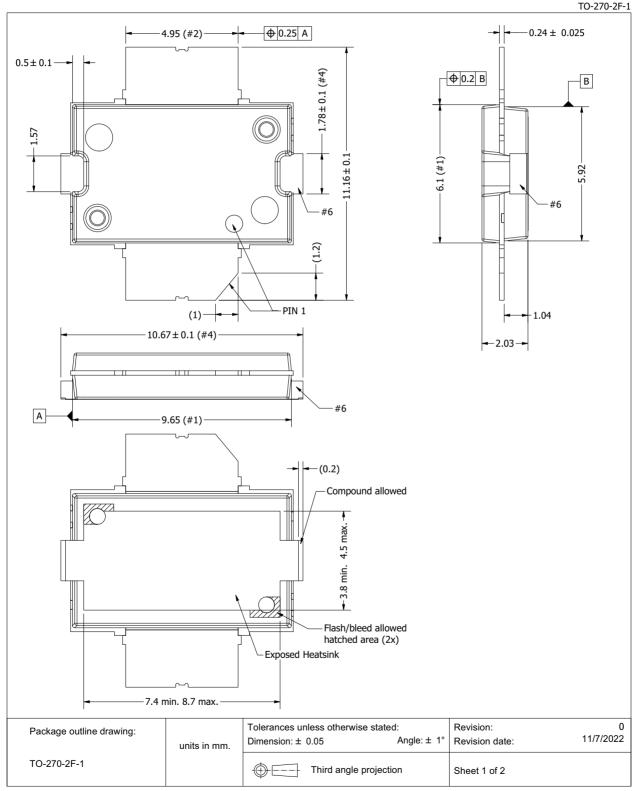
Package outline TO-270-2F-1 (sheet 1 of 2)
